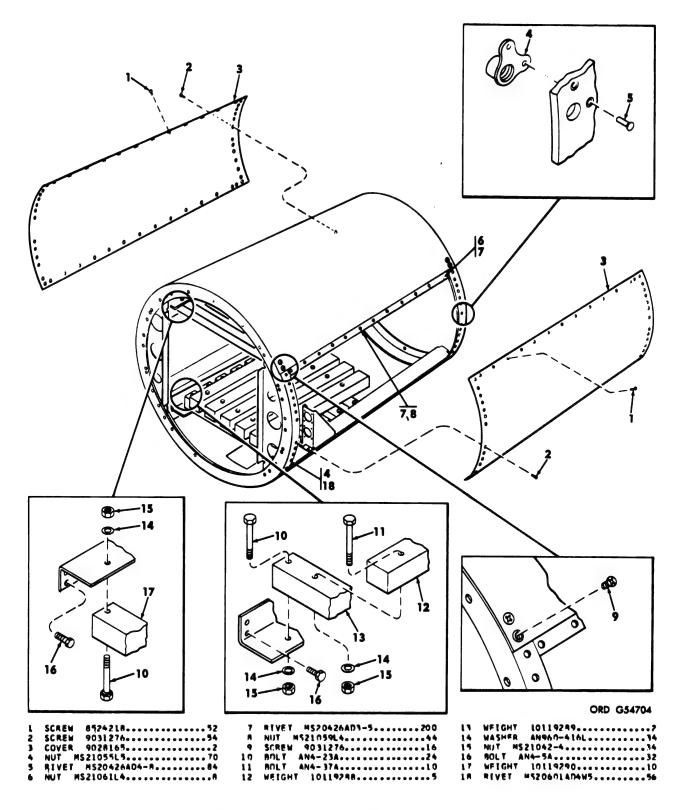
STRUCTURE ASSEMBLY, FQUIPPENT AND POWER /10119280/ /SEF FIGURE 161 FOR NEXT HIGHER ASSEMBLY/
